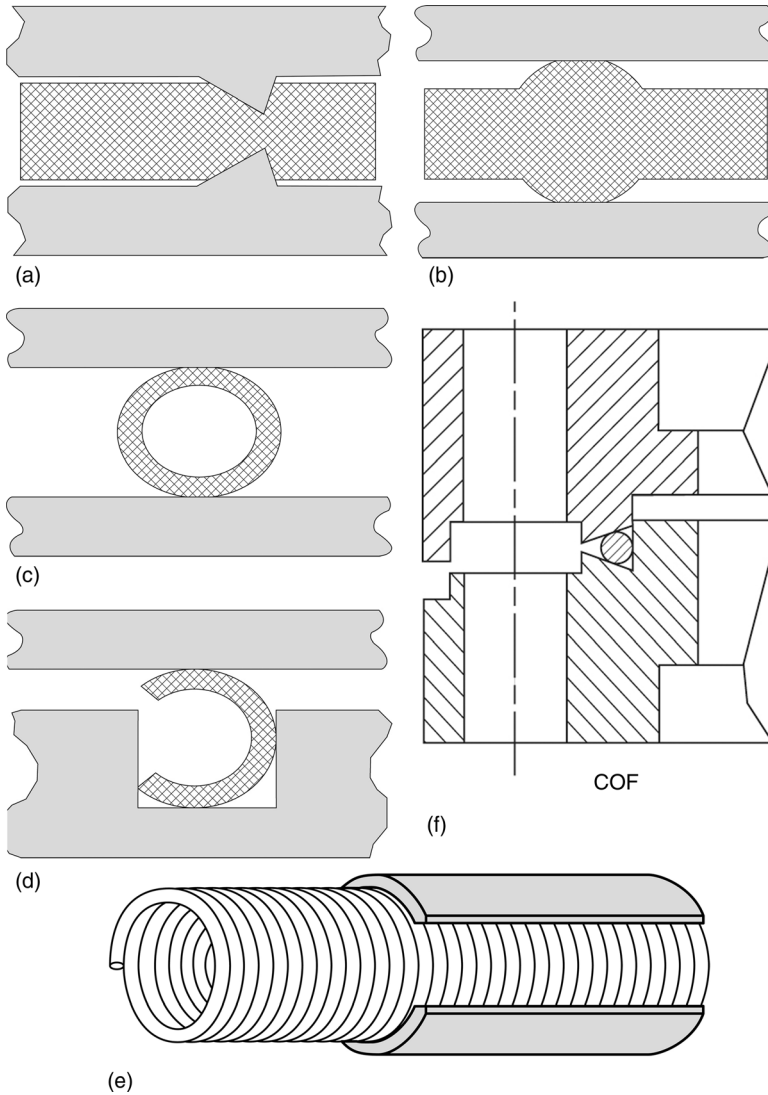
Metal seals: Flat seal and sealing surfaces with knife edge (a), profile seal (b), metal O-ring seal (c), C-ring (d), spiral Helicoflex[®] (e), COF flange system (f).
